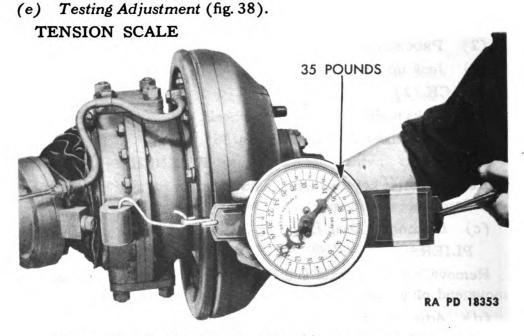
Testing Steering Knuckle Bearing Adjustment Original from Digitized by Google UNIVERSITY OF CALIFORNIA
